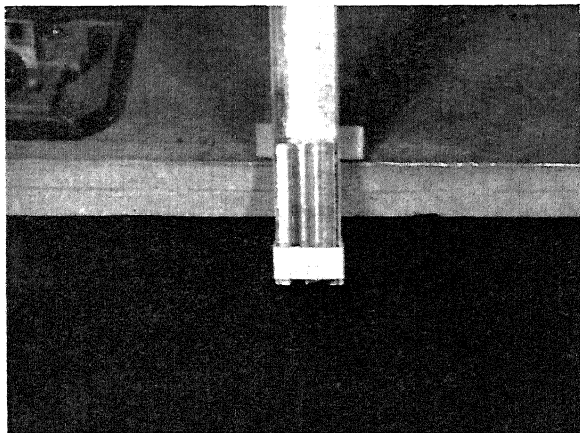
Holder for flat parts which delivers parts in predetermined quantities.
